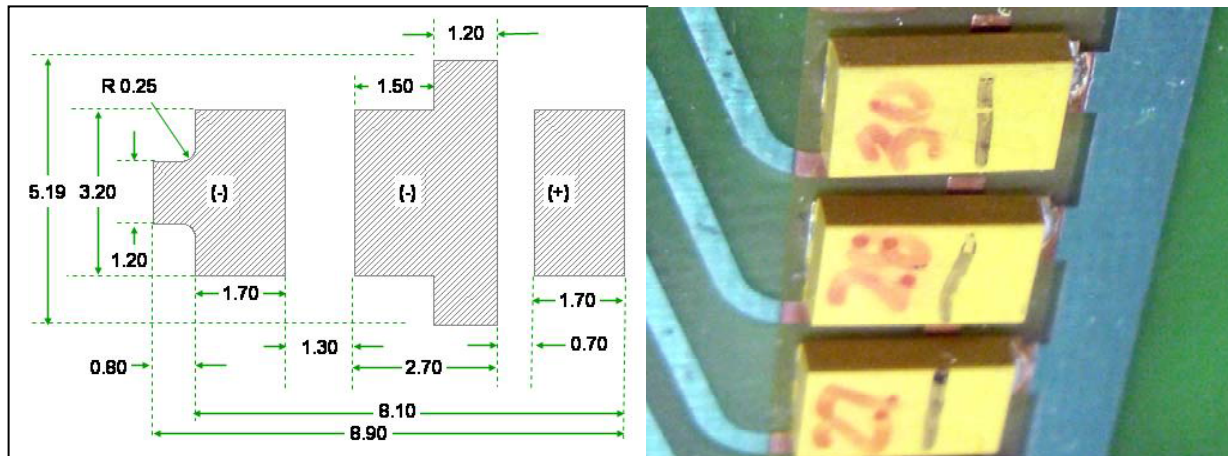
Modified solder pads from Sanyo layout, and mounted chips at very edge of back cathode plate.
